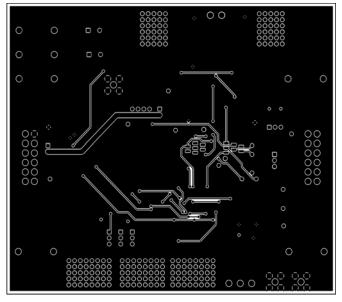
EVAL-ADM1073EB Evaluation Board Solder-Side Silkscreen
